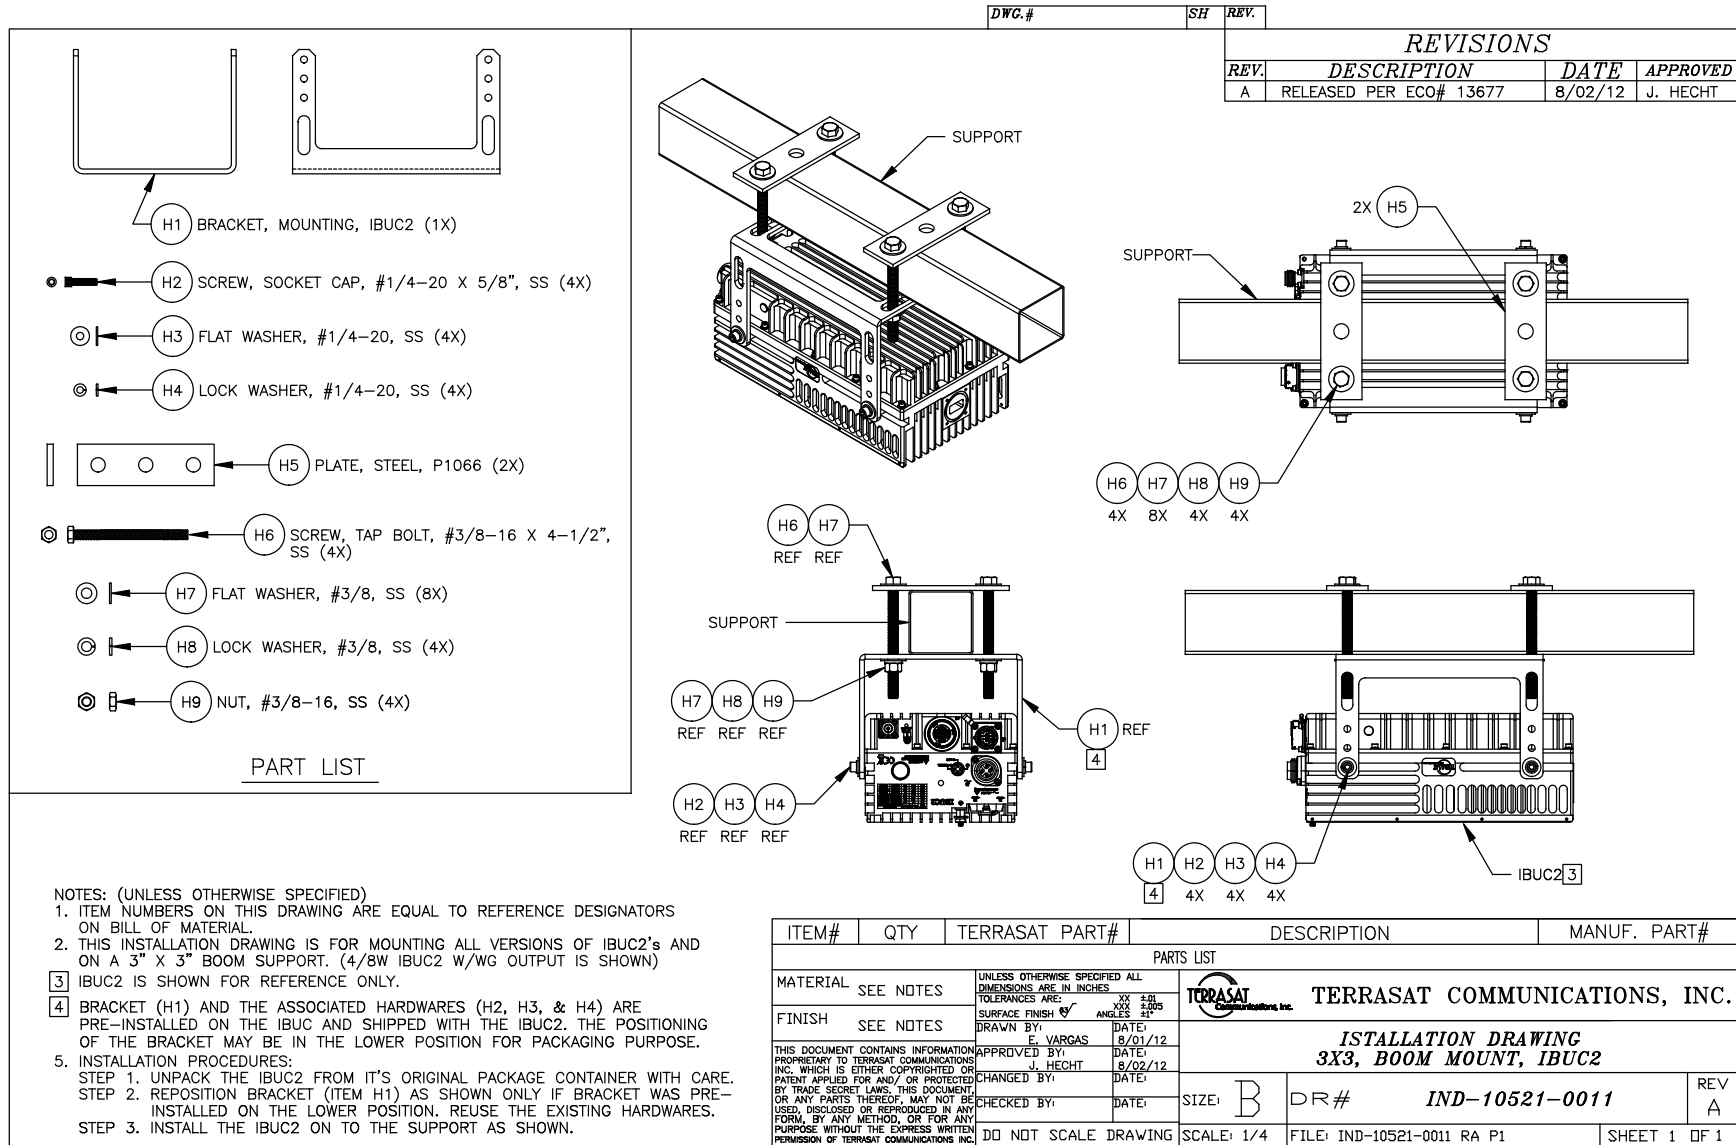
Example Installation Drawing, IND-10521-0011, Rev A
